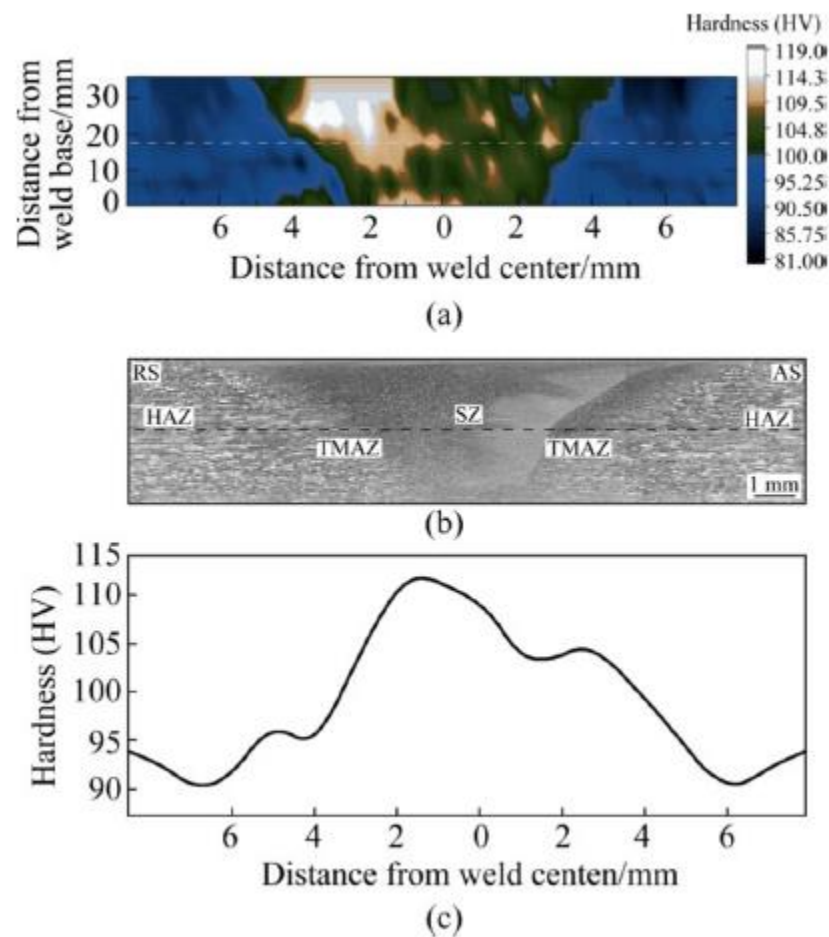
Hardness map of FSW joint a) macro structure of welded samples b) its zones
